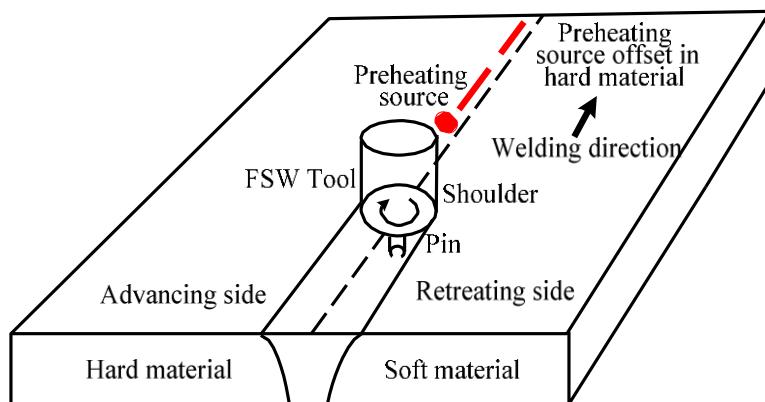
Basic principle of plasma-assisted friction stir welding of dissimilar joint [3-15]
